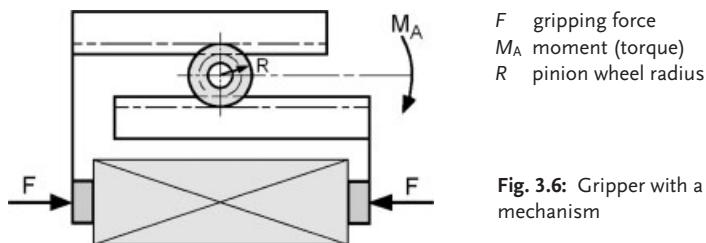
Gripper with a toothed rack and pinion mechanism
